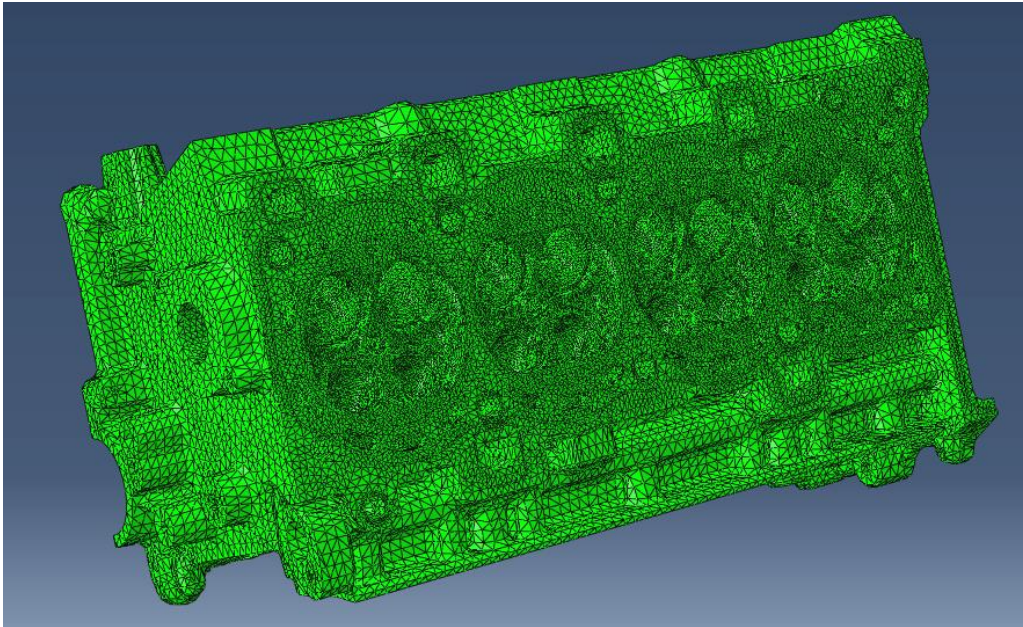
Meshed cylinder head: View is of the hot side (combustion chambers) of the cylinder head, which consists of 1,060,558 nodes and 606,862 elements.
